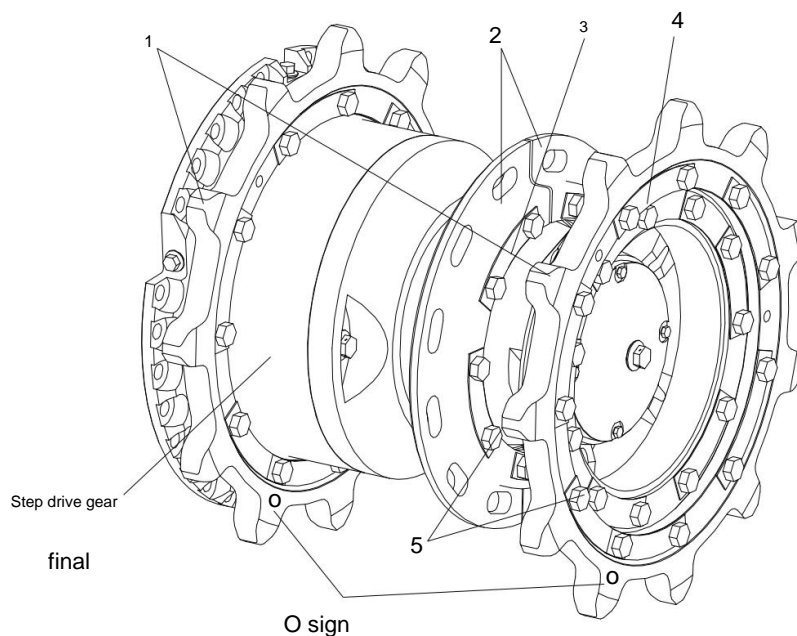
The belt drive gear is secured to the final drive gear using bolts (5) and washers.
